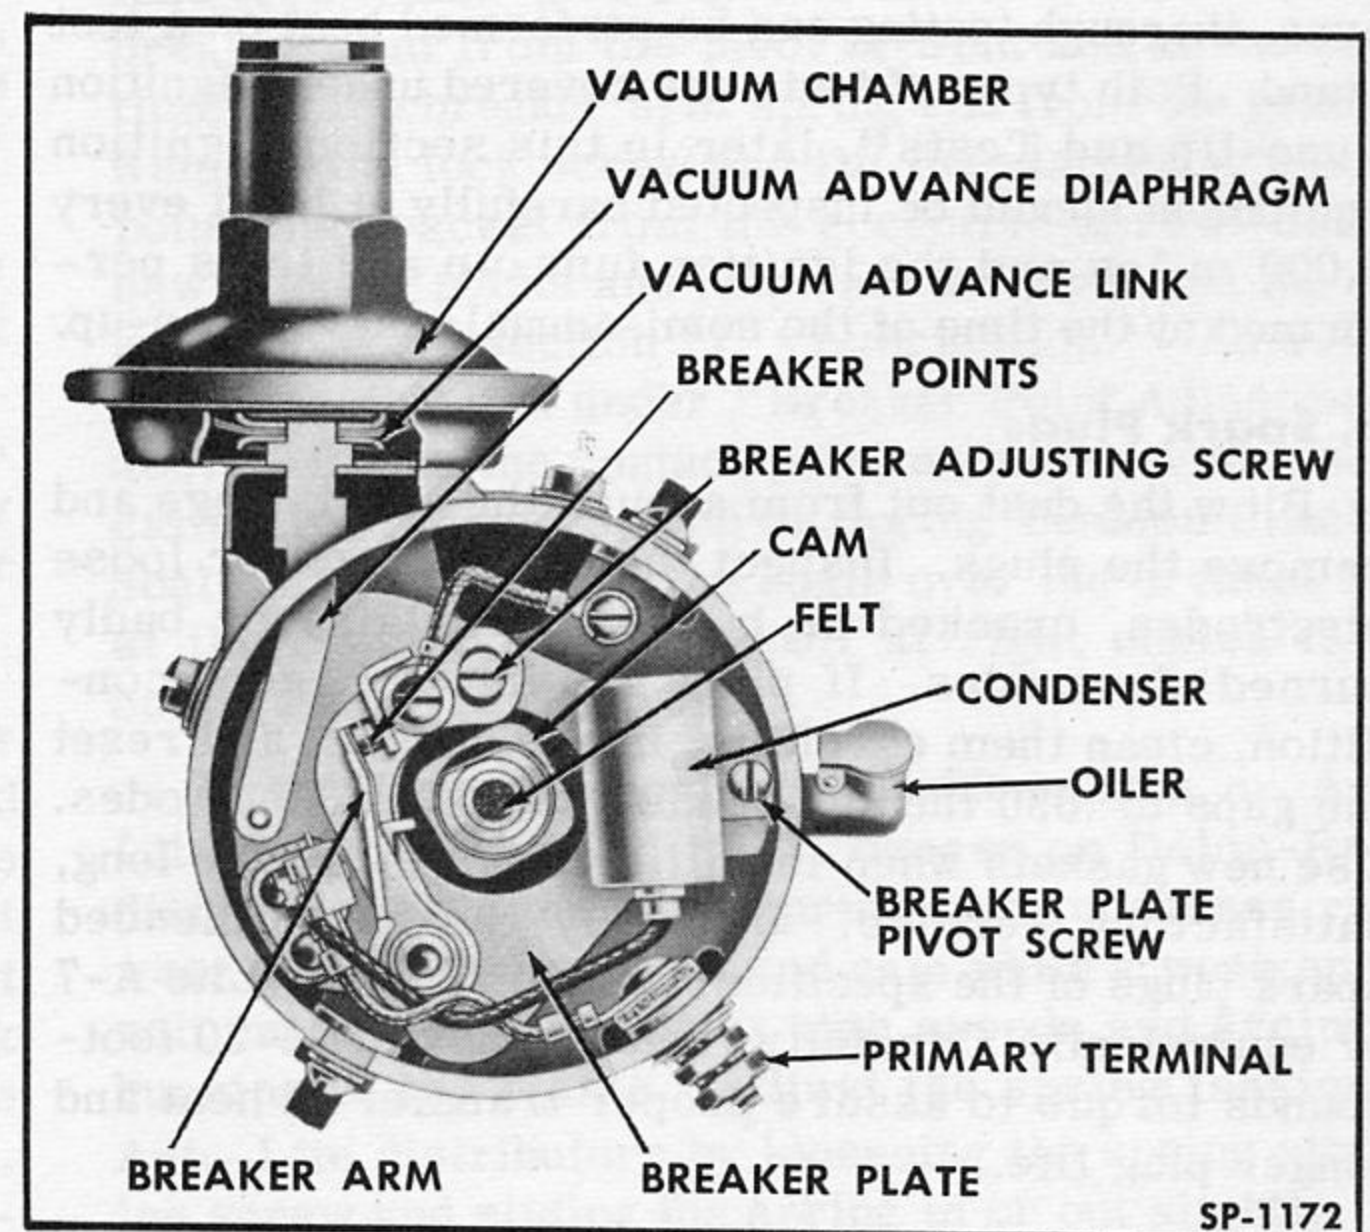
Auto-Lite Distributor—Cap and Rotor Removed (4 Cylinder Shown)
